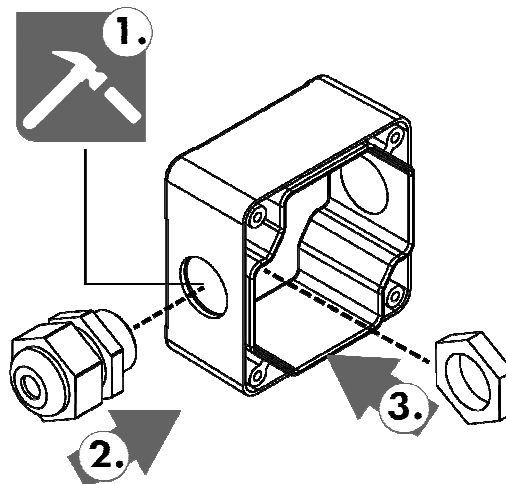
Mounting of cable gland (respect the tightening torque of the cable gland!)
